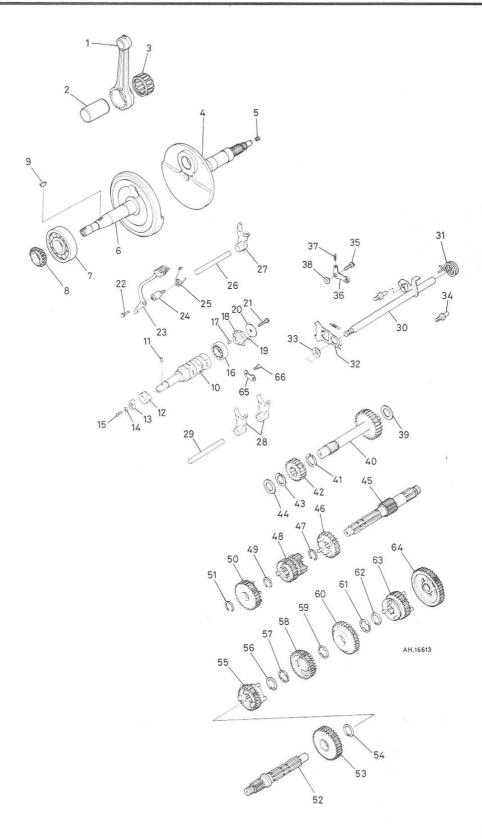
Bottom end - KLT160 (Sec 28)
